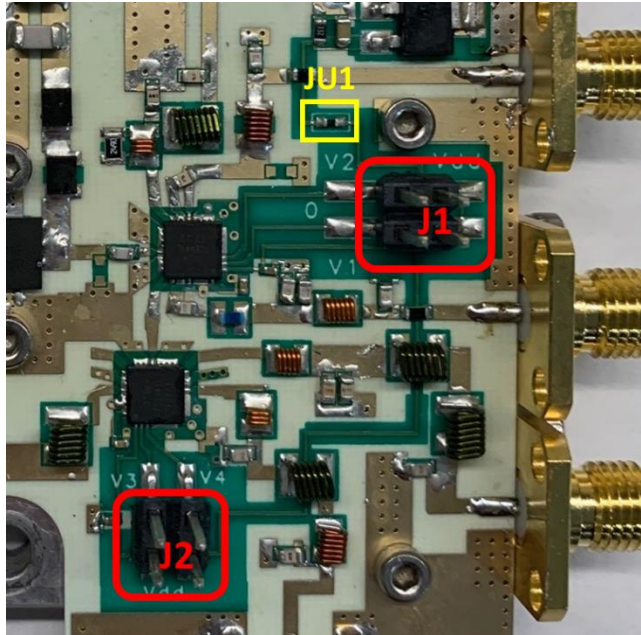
TA9310E + TS8441L EVB-I Assembled board Picture.
